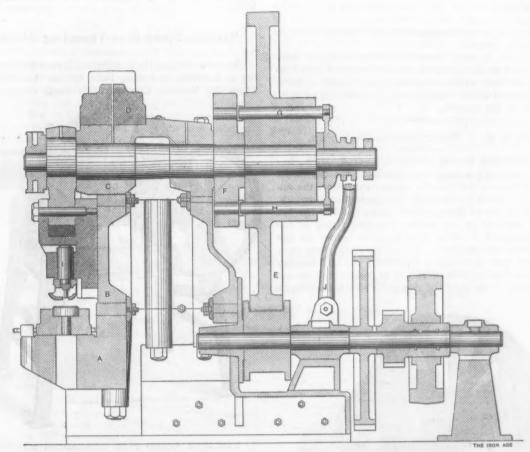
Sectional View of Pawtucket Cold Nut Press.
